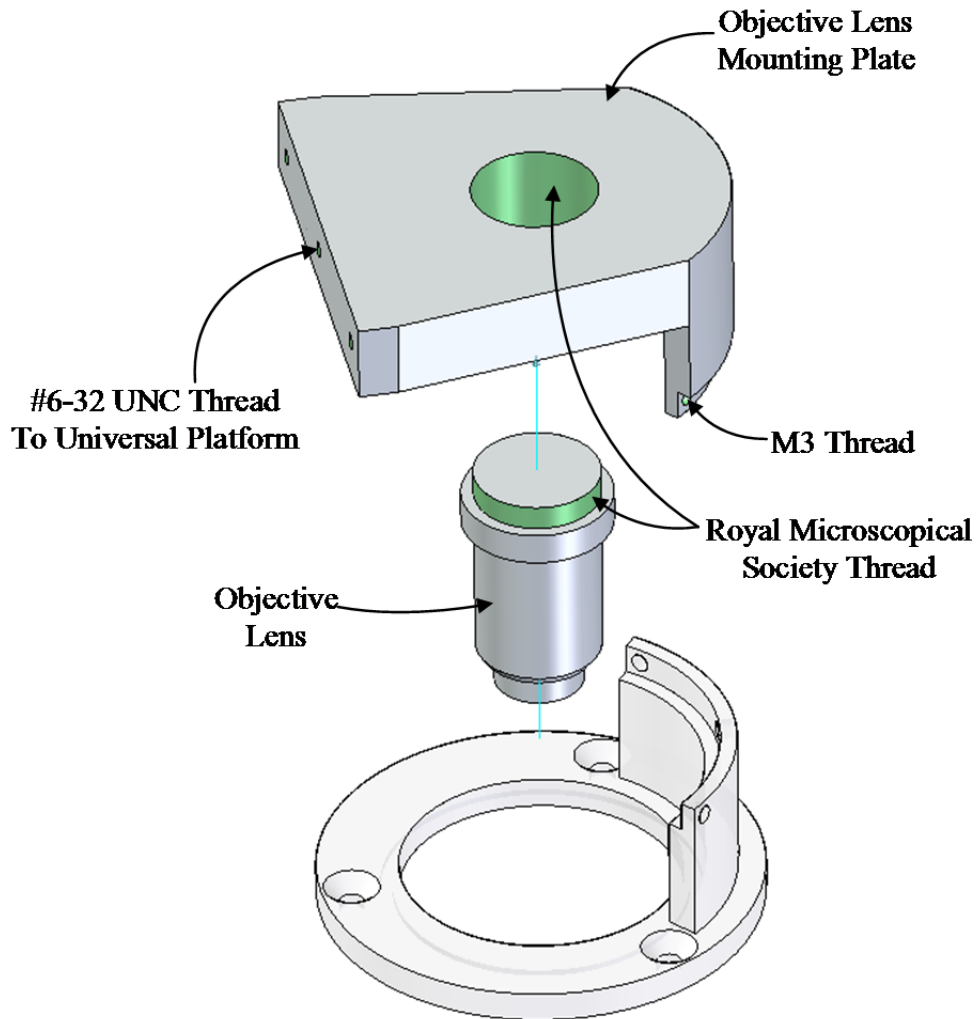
Rendered exploded view of the objective mount plate assembly
